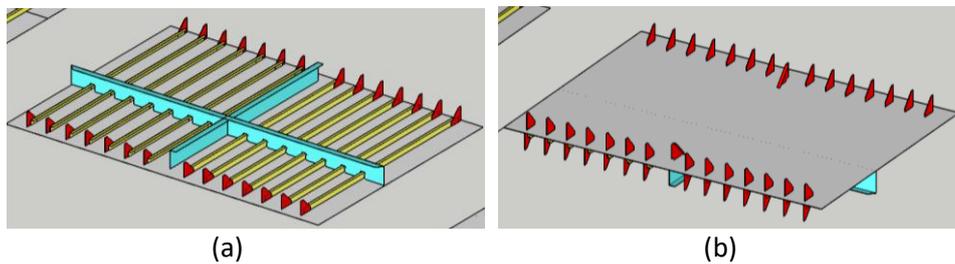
Joint (a) Stringer to transversal bulkhead, and (b) Back side transversal bulkhead
